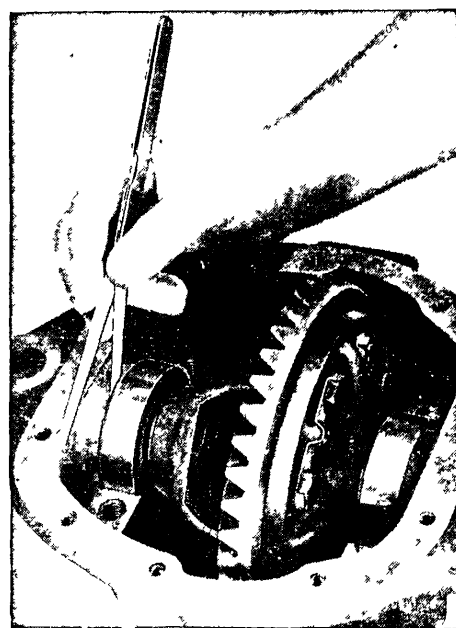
Checking clearance between bearing cup and differential case in shim-adjusted differential bearings
